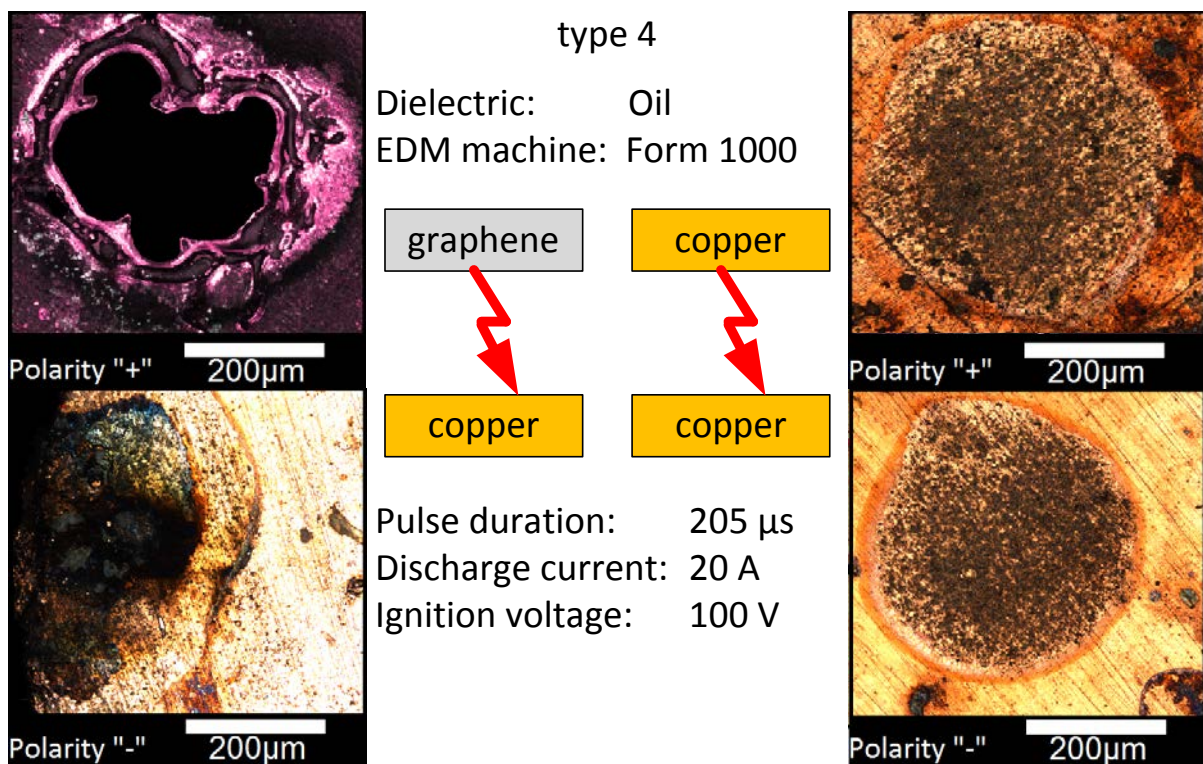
Comparison of the craters generated by Type 4 pulse. Left is a tool coated with graphene and right is an uncoated copper tool, craters on the workpieces are below the craters on tools.
